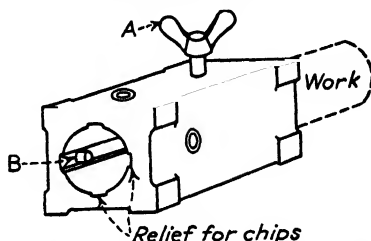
Square jig for drilling cross holes. Work held by screw *A* located by pin *B*. Relief grooves for chips add to its usefulness.
